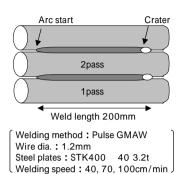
Schematic diagram of pipe welding crack examination
